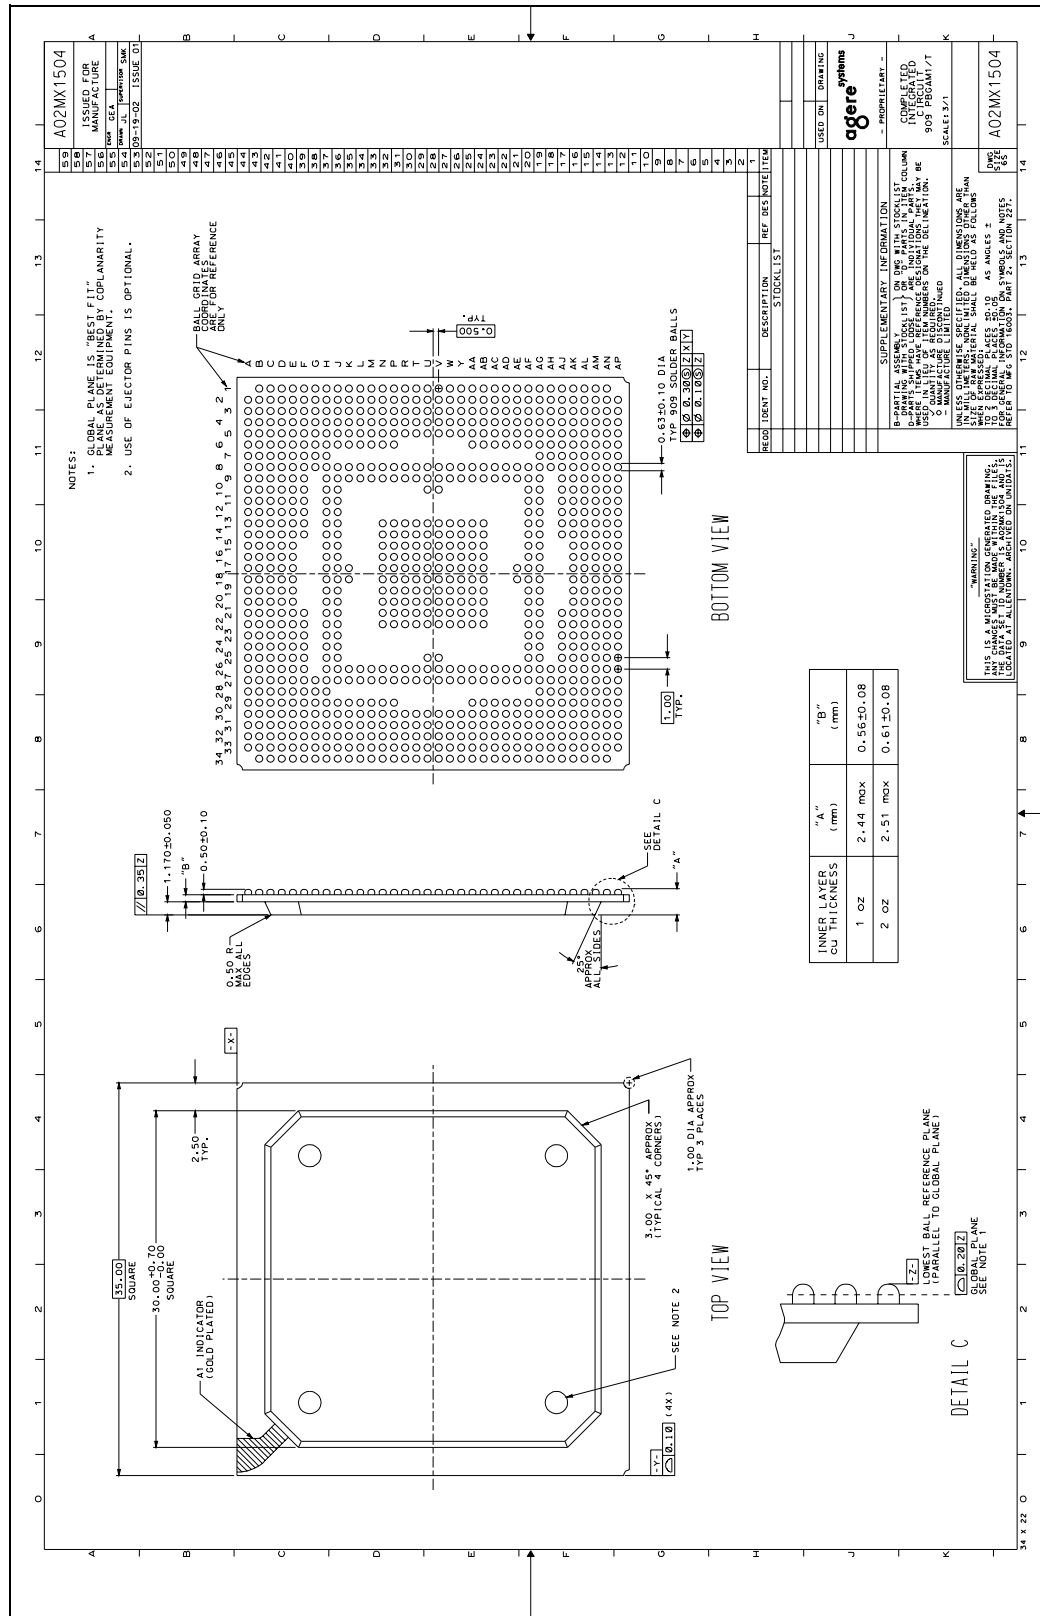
Ultraframer 909-Pin PBGA Balls and Dimensions
